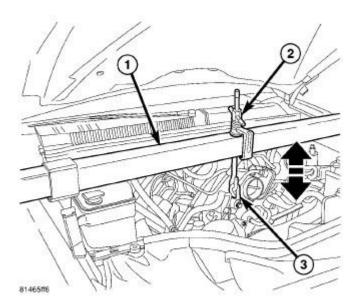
ENGINE SUPPORT TOOL Courtesy of CHRYSLER LLC
